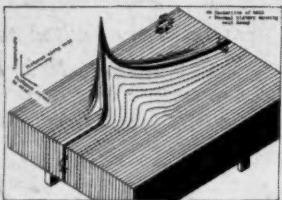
"Tubercular Anatomy" of Heat Flow in Welding.
